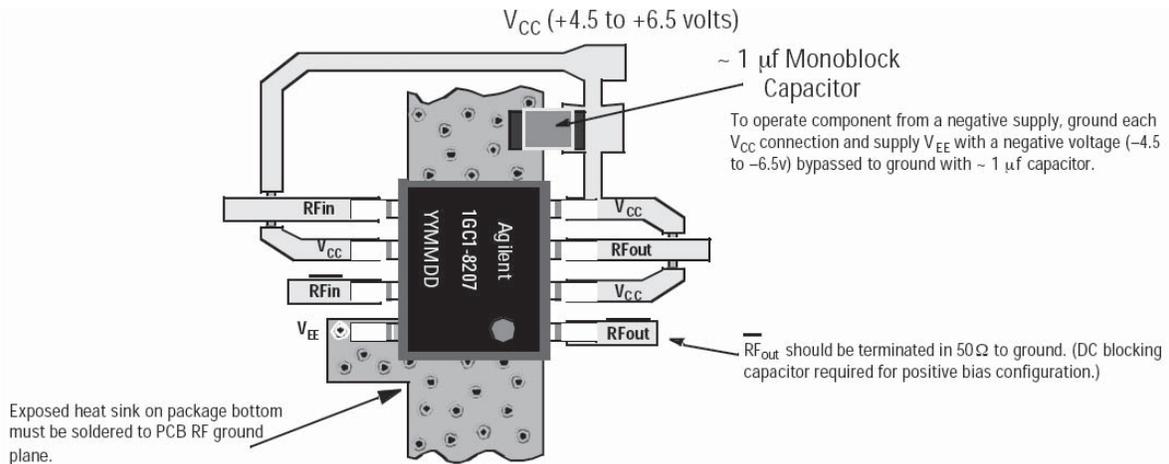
Assembly diagram (Single-supply, positive-bias configuration shown)
